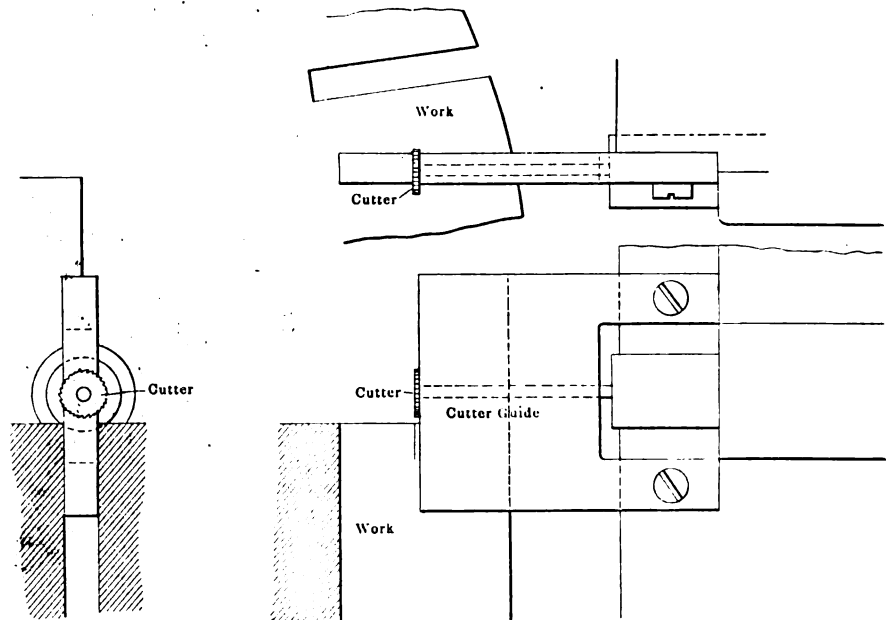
ARRANGEMENT OF CUTTER AND GUIDE FOR MILLING WARD SLOTS
